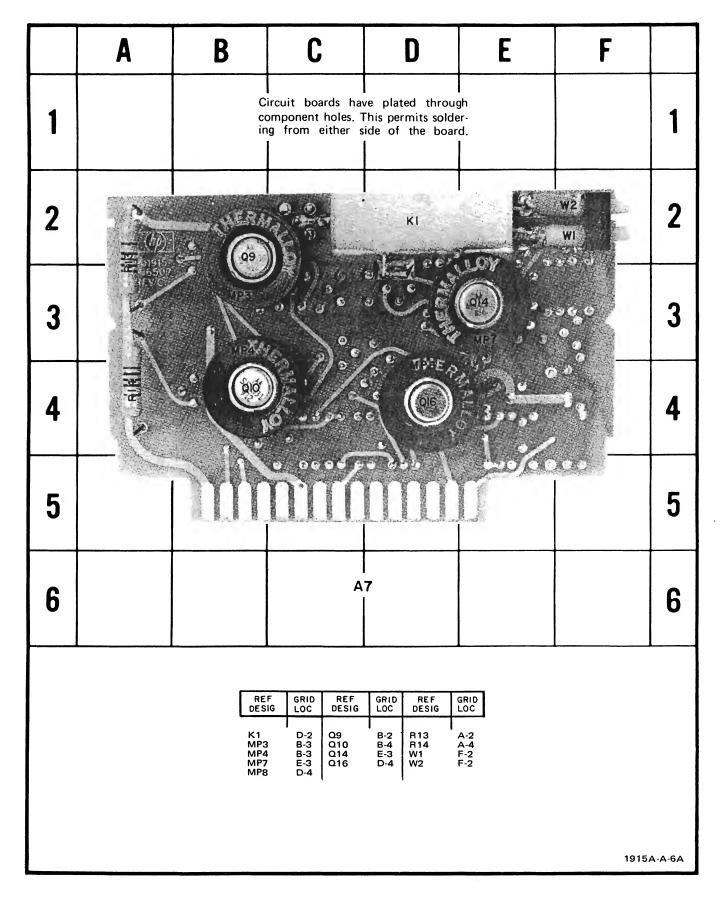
Offset and Power Supply, A7, Component Identification (Rear View)
